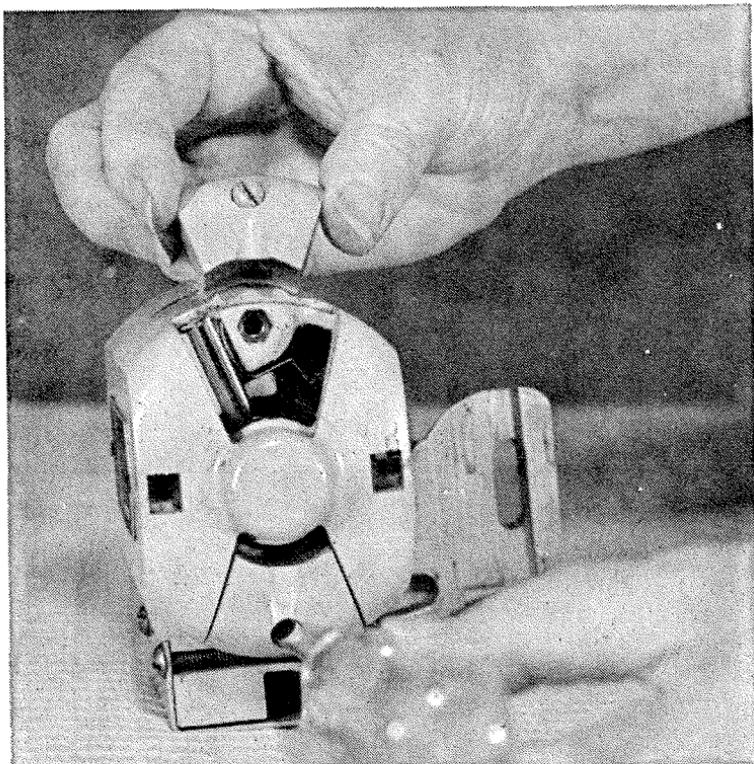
The motor brushes on the Singer Model 319W motor are made accessible by removing covers on the end of the motor opposite the pulley.
